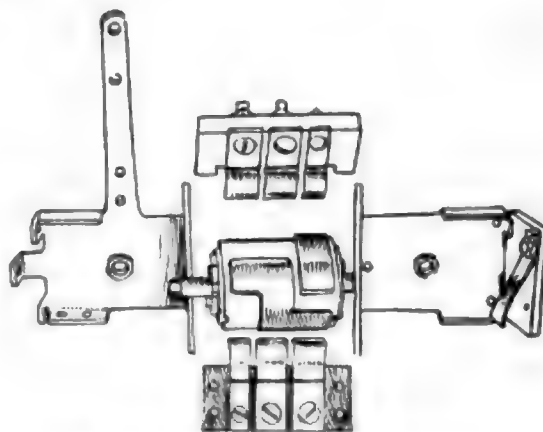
Exploded view of drum switch used by Wagner Electric Co.
